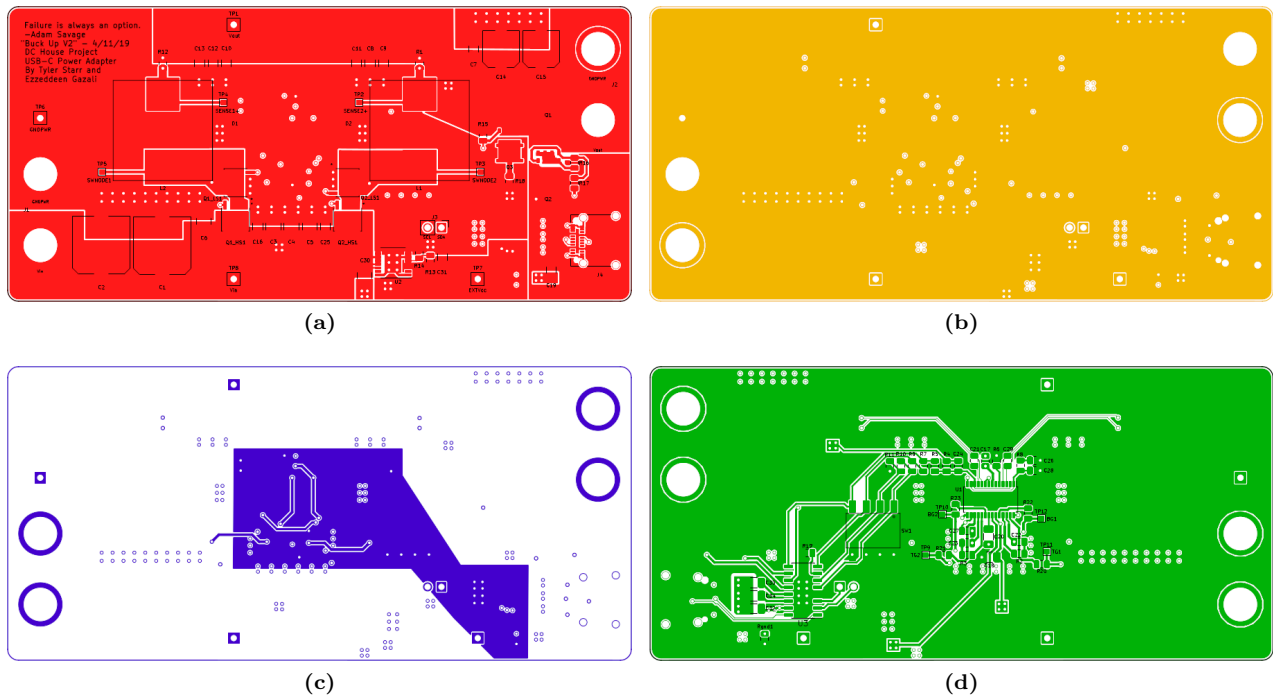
(a) Layer 1 of fielded PCB (b) Layer 2 of fielded PCB
